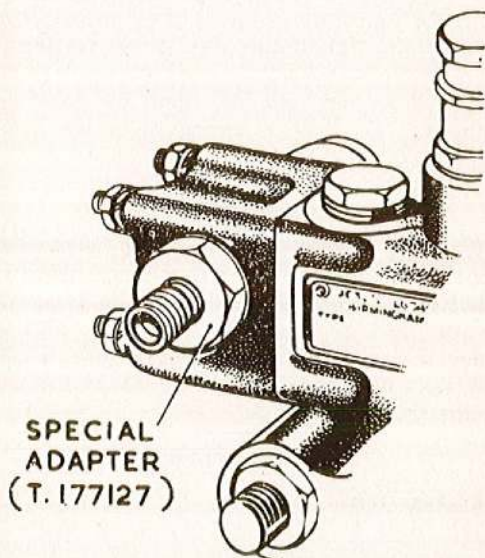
View showing adapter T.177127 fitted for test rig purposes
